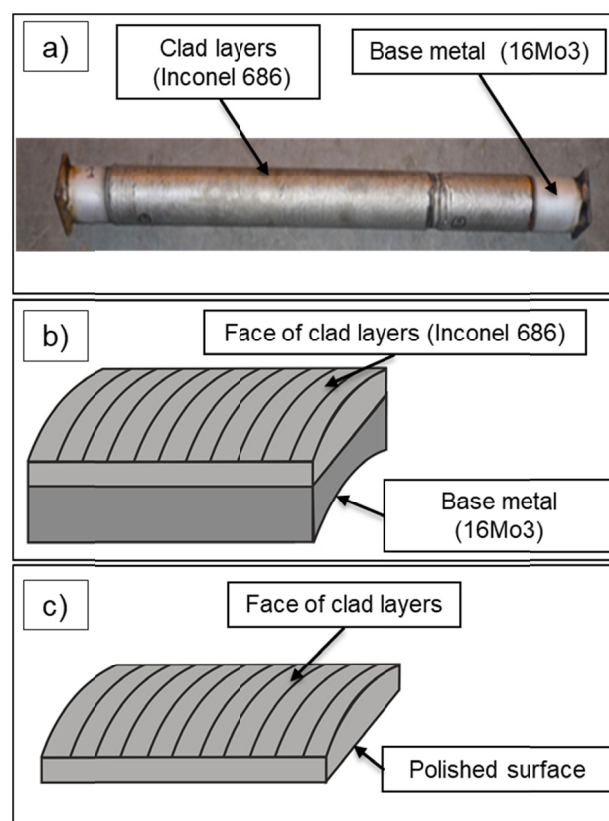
a) Schematic diagram of Inconel 686 clad layers on the boiler tube; b) piece cut out from clad tube; c) specimen with removed base metal, ready for corrosion experiments in ashes
